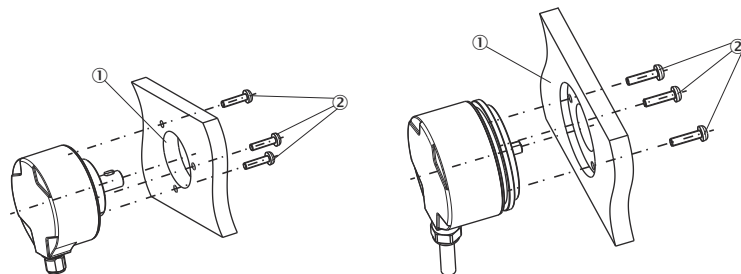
Mounting a face mount flange using threaded holes on the flange side
